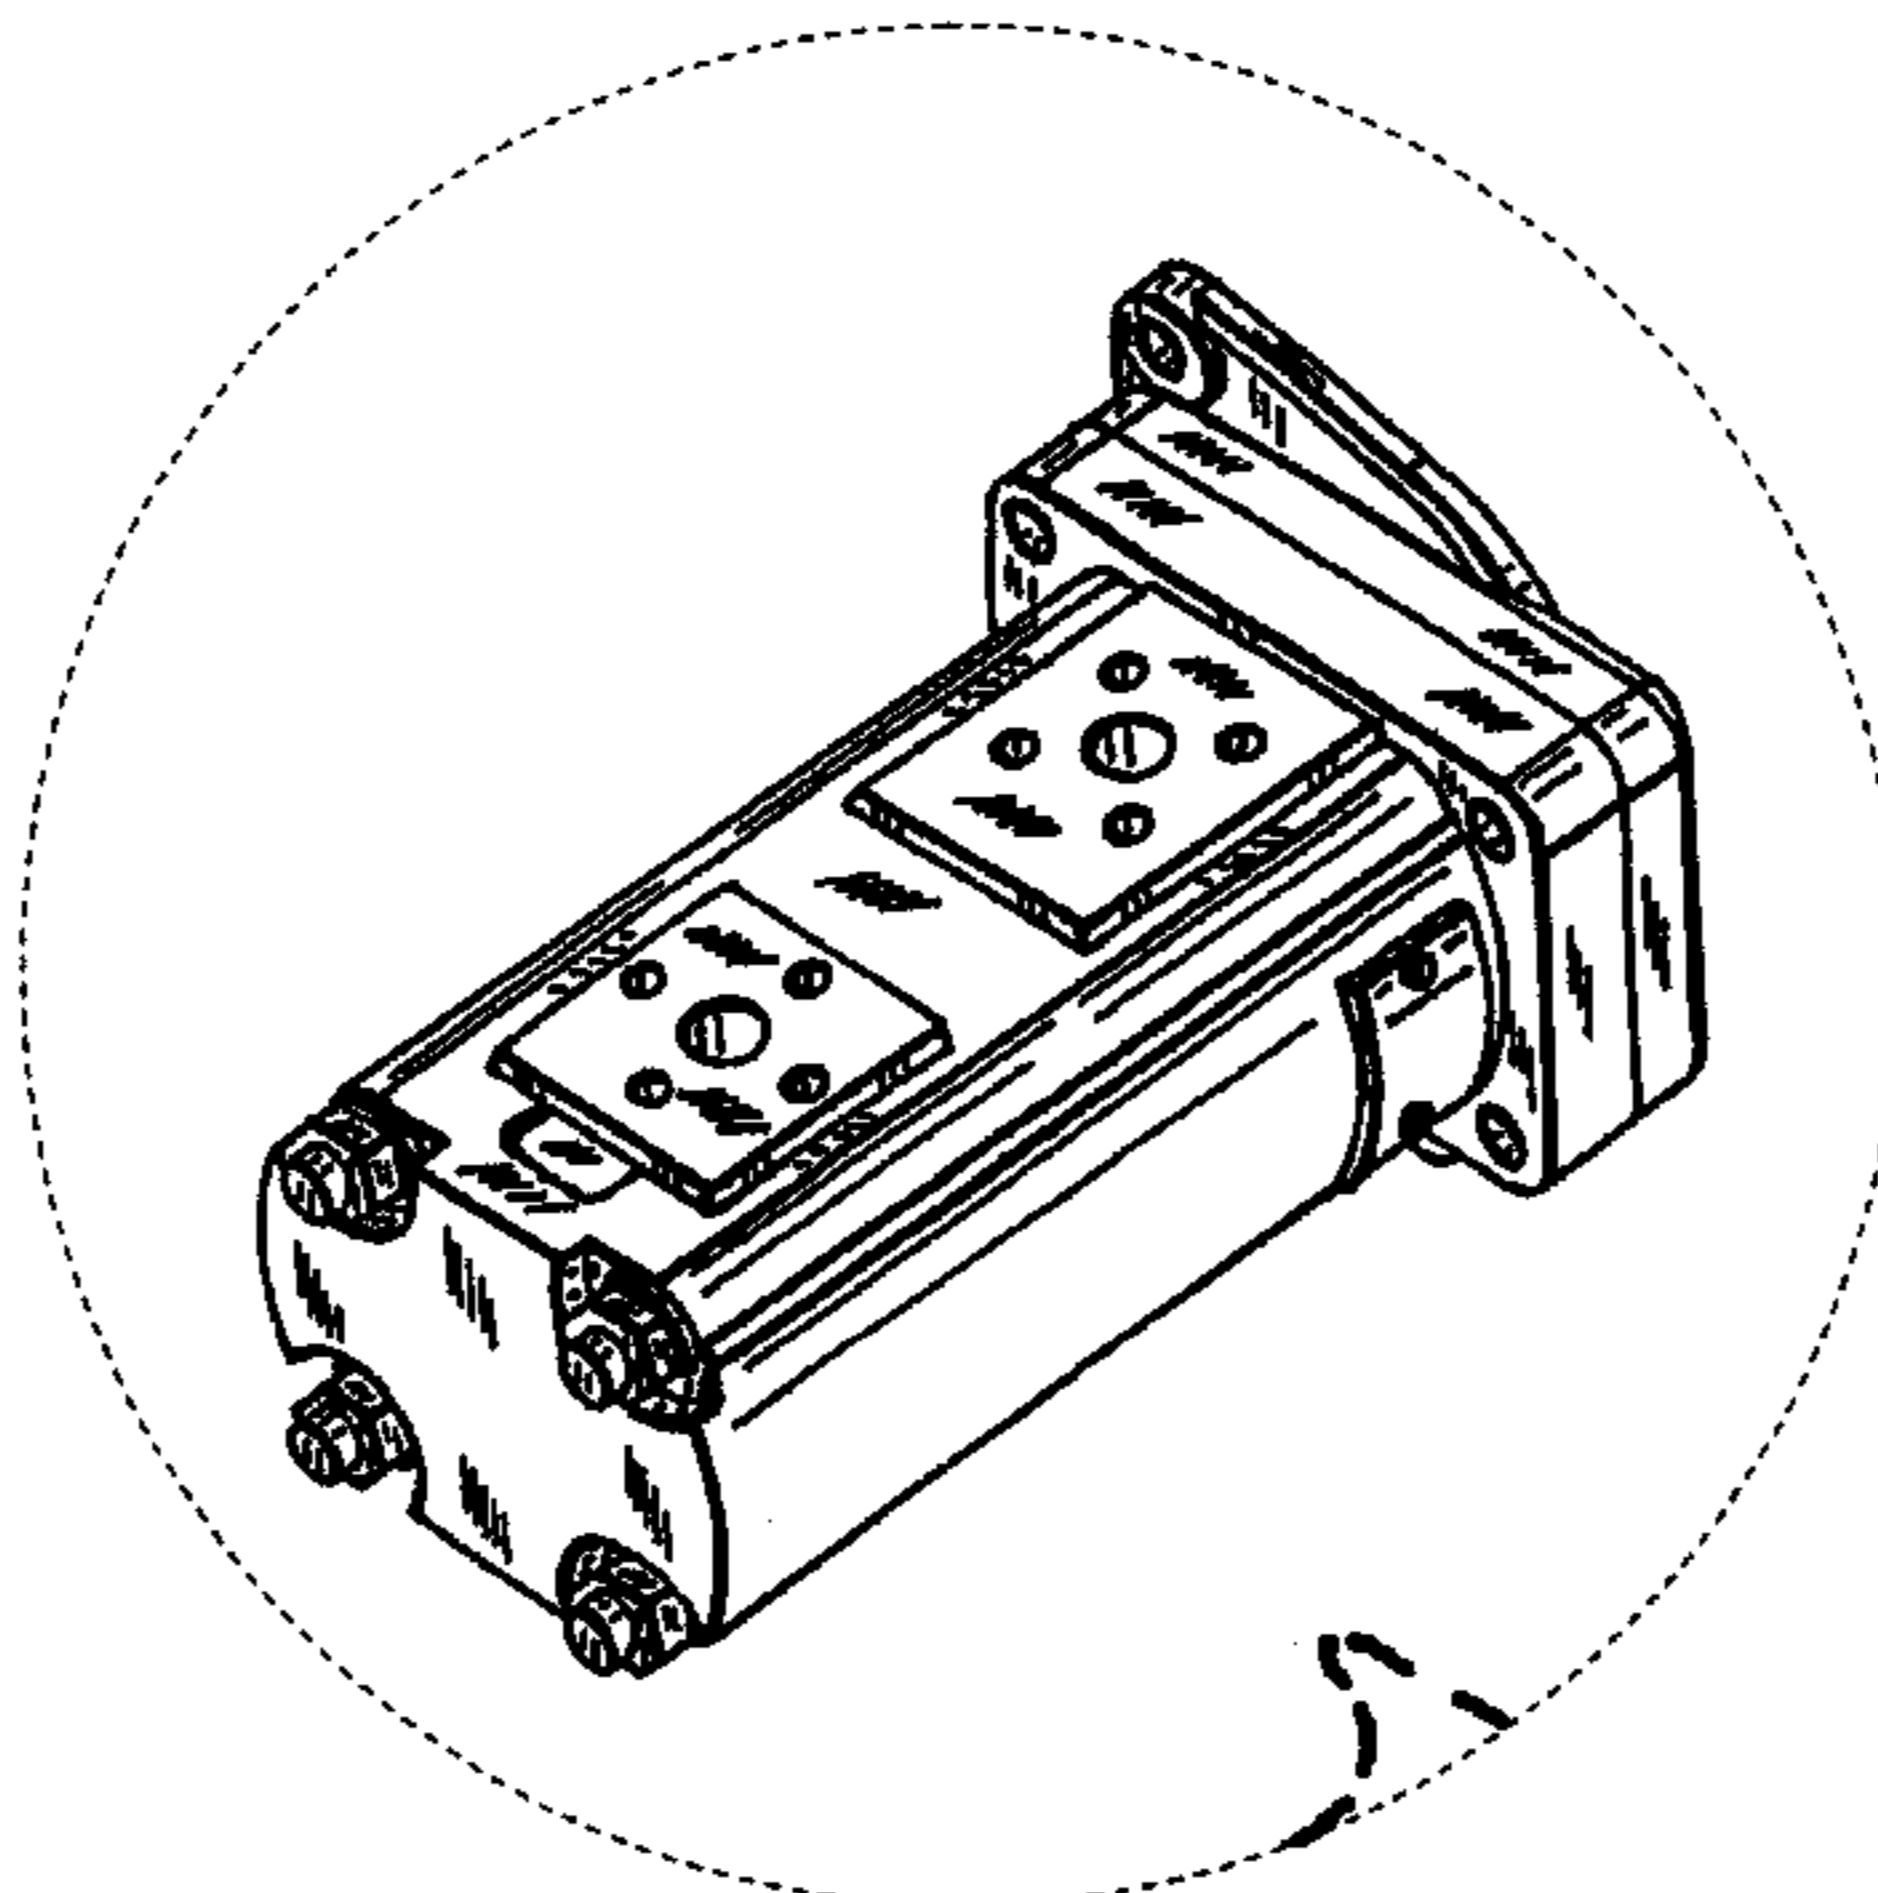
is an enlarged fragmentary view of the preferred embodiment of FIG. 3;
